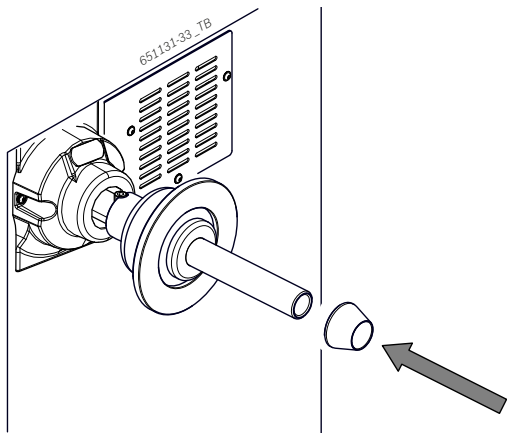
Positioning the appropriate cone on the shaft (flange)
